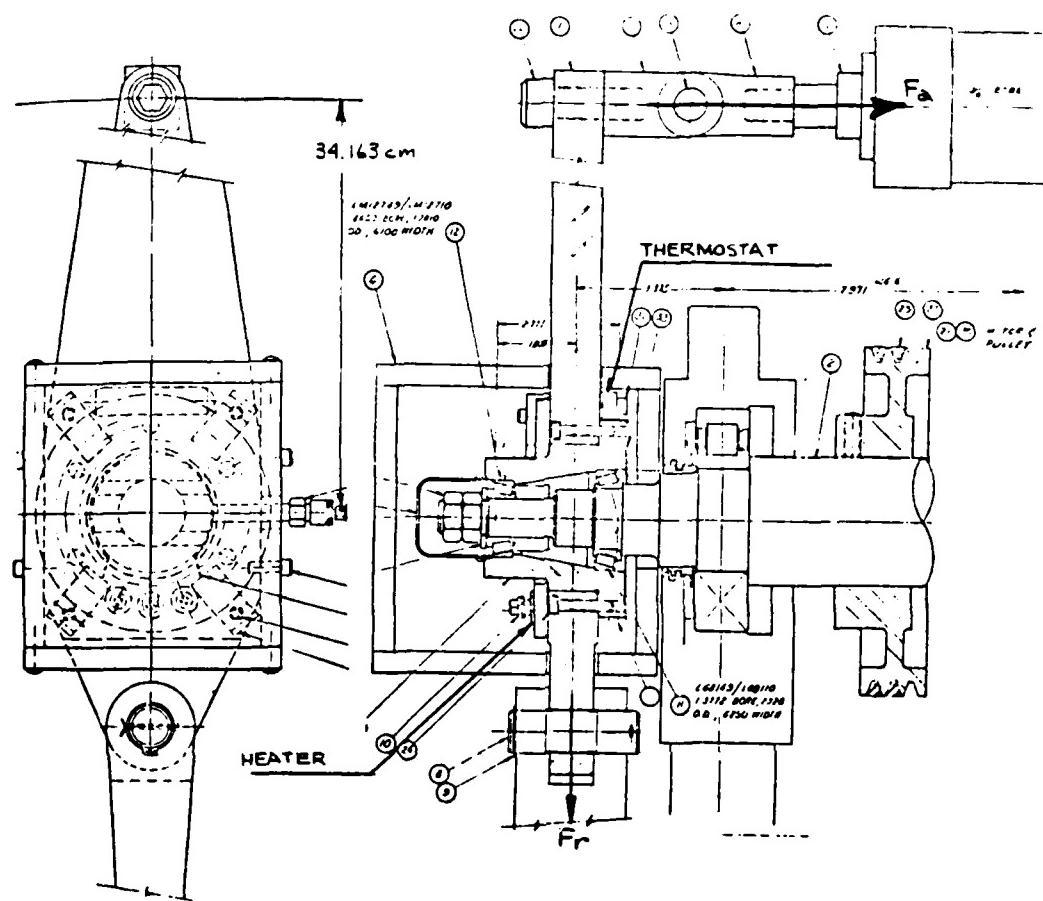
Schematic of hub assembly front wheel bearing grease test machine.
